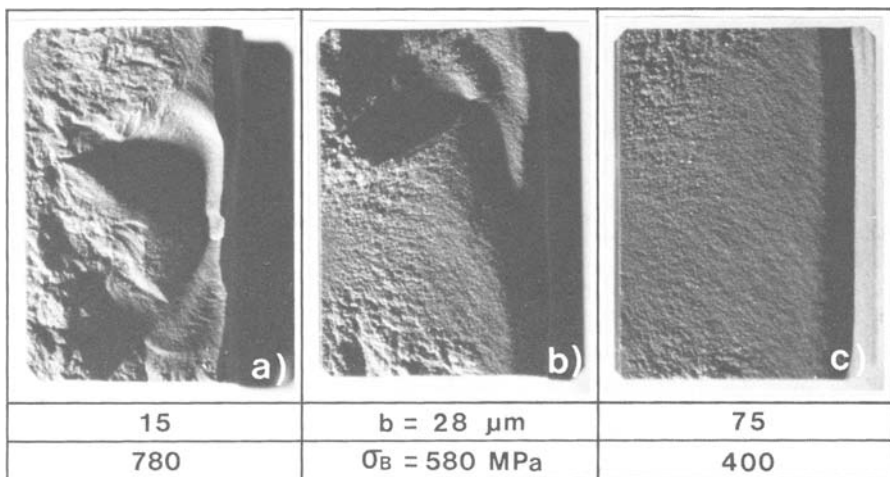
Macroscopic fracture surfaces of PLSSN notch specimens, illustrating three different fracture surface profiles.
